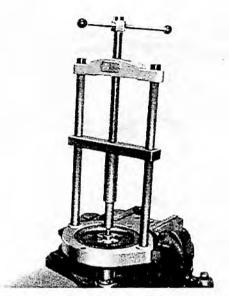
REMOVING THE IMPELLER (23C and 87 mm. ENGINES).
